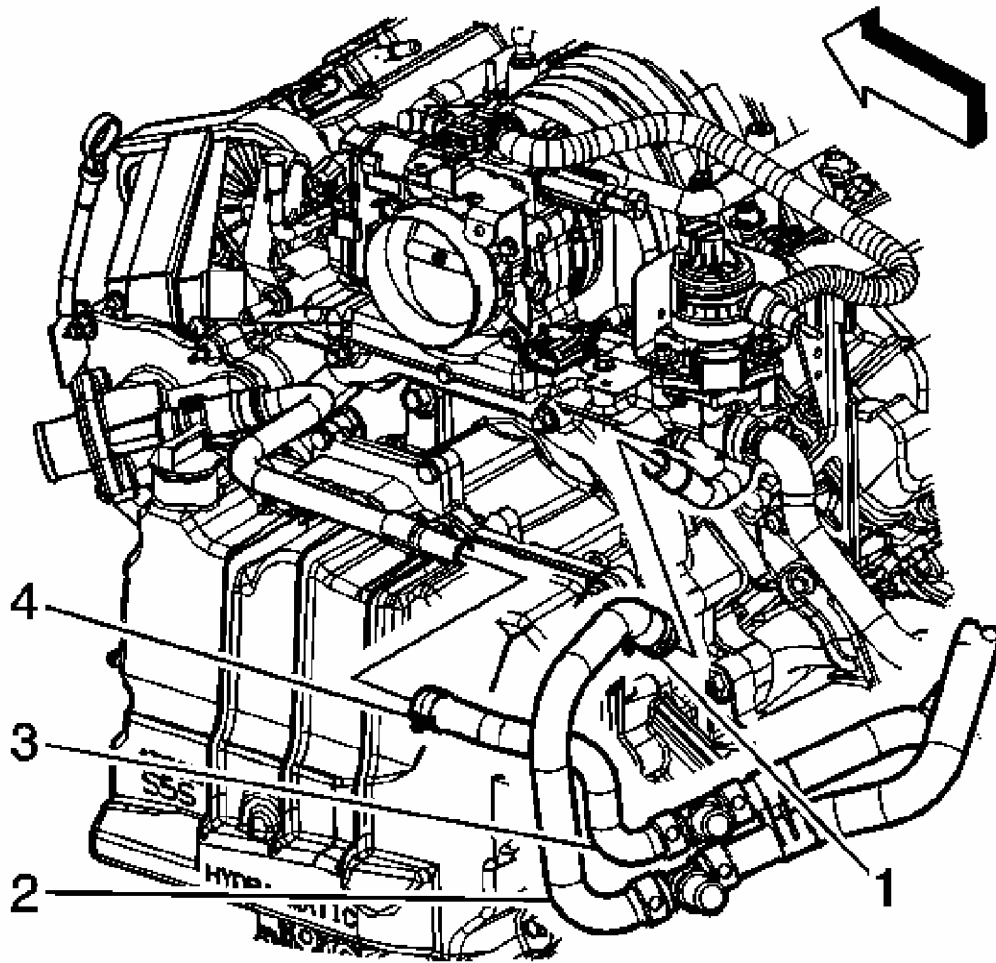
Identifying Heater Inlet & Outlet Hoses
